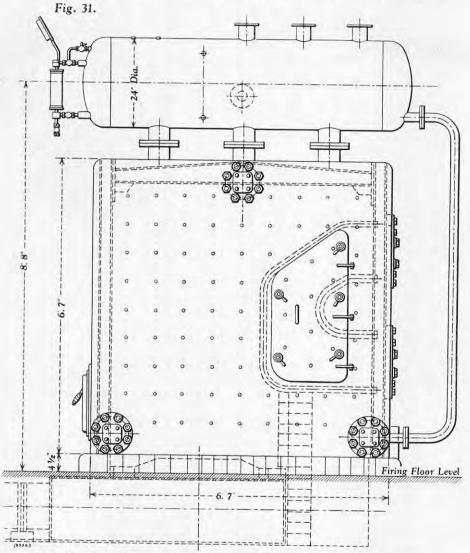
Low-Pressure Steam Boiler; Bouellat Engineering, Ltd.
